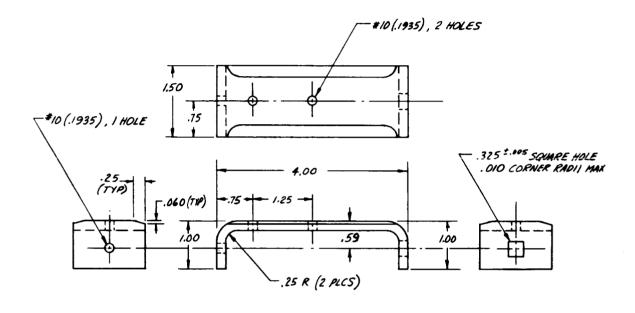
Bracket Installation Spoke Extension Cable
